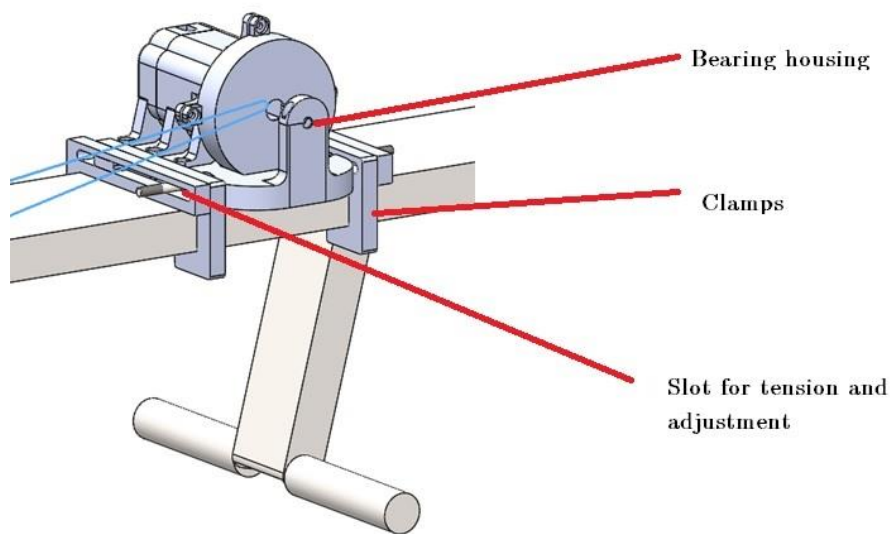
Motor housing and frame attachment system is shown interfacing with the frame body.
